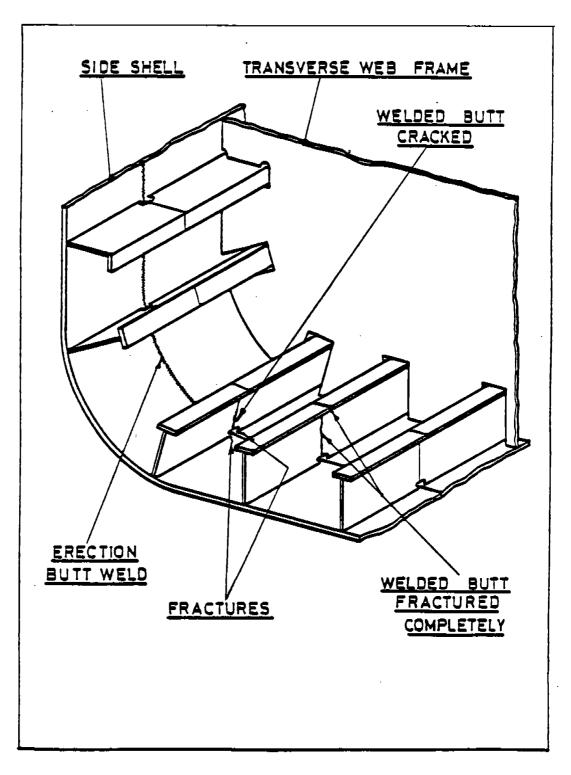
TYPICAL BOTTOM LONGITUDINAL CRACKING
